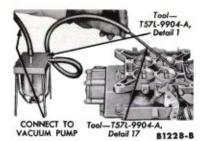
Typical Ford 4-Barrel Carburetor Power Valve Test
